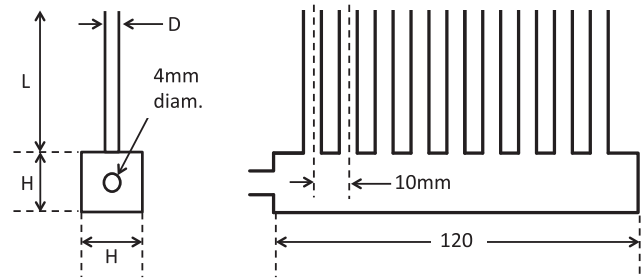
Geometrical dimensions of the heat exchanger investigated, to match Ref. [1].
